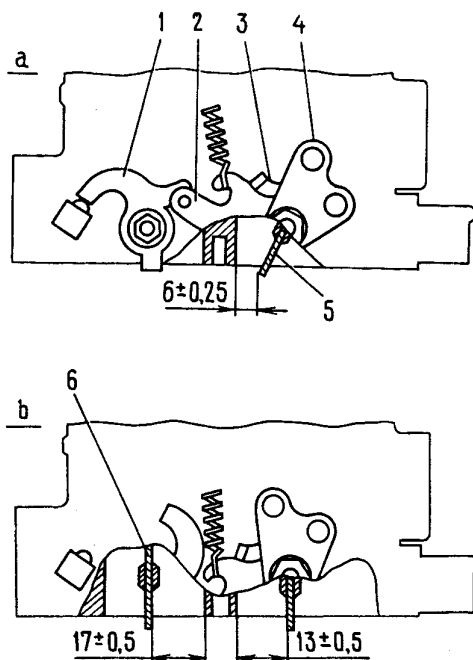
Adjusting Position of Throttle Valves in Carburetors 2107-1107010-10 and 2107-1107010-20:
